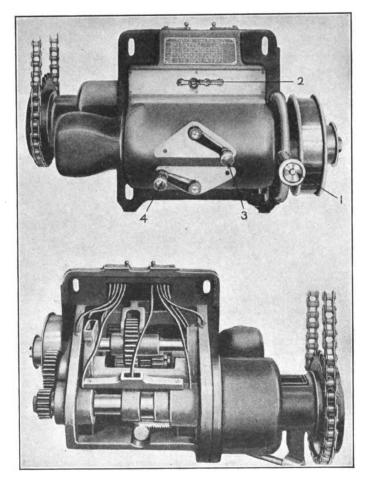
Feed changing mechanism on Brown & Sharpe miller.
